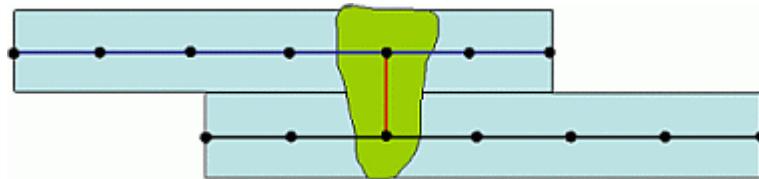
Alternative method for overlap and laser edge overlap welds
